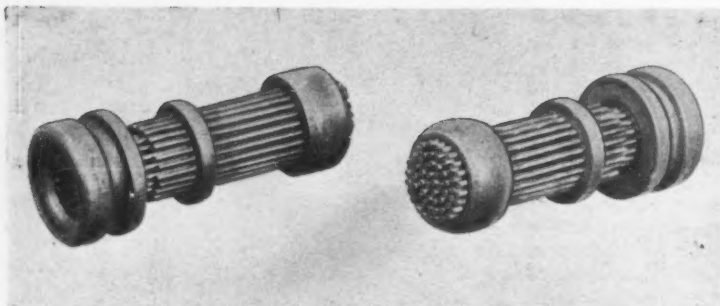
An Assembly Comprising Small-bore Stainless-steel Tubes, Copper-brazed to End and Intermediate Plates
